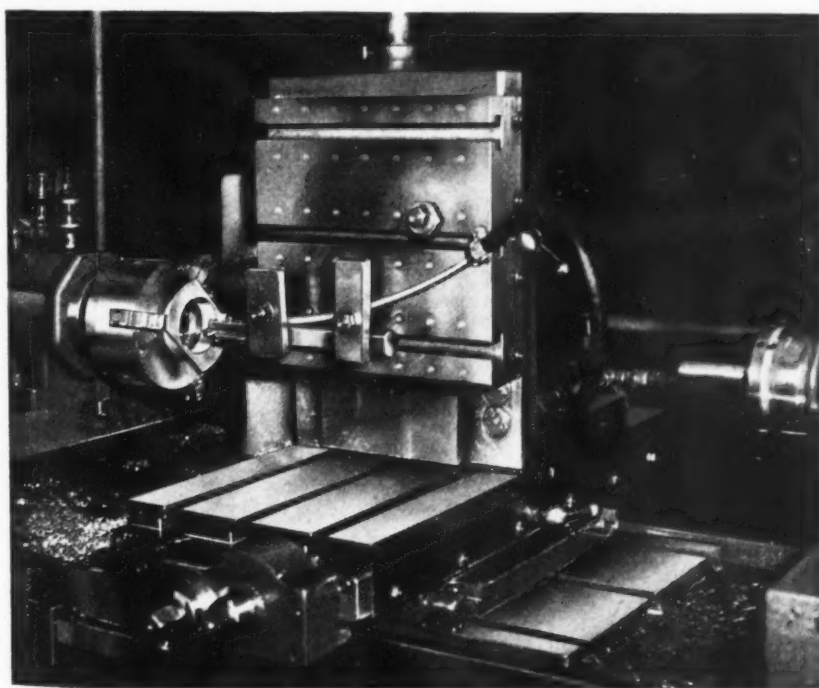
Precision Boring Machine Equipped with a Universal Fixture which Readily Adapts the Machine to the Handling of Limited Quantities of Work
